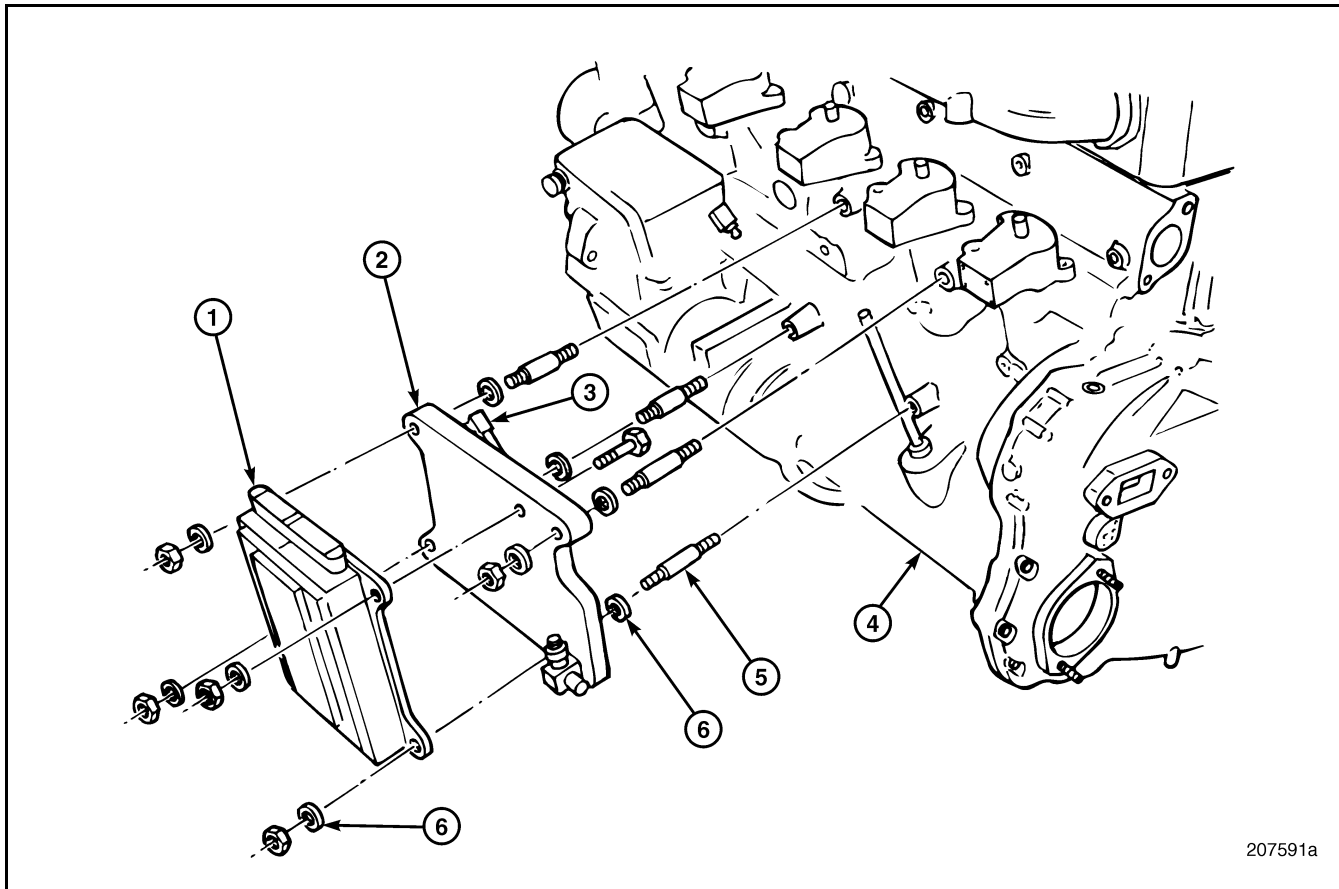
Engine ECU/Cooling Plate Installation (Right-Side Mounted Unit)
